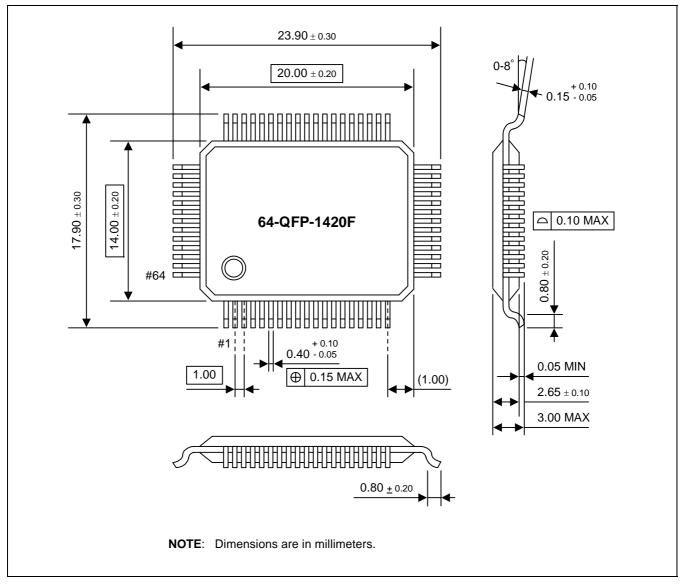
64-Pin QFP Package Dimensions (64-QFP-1420F)
